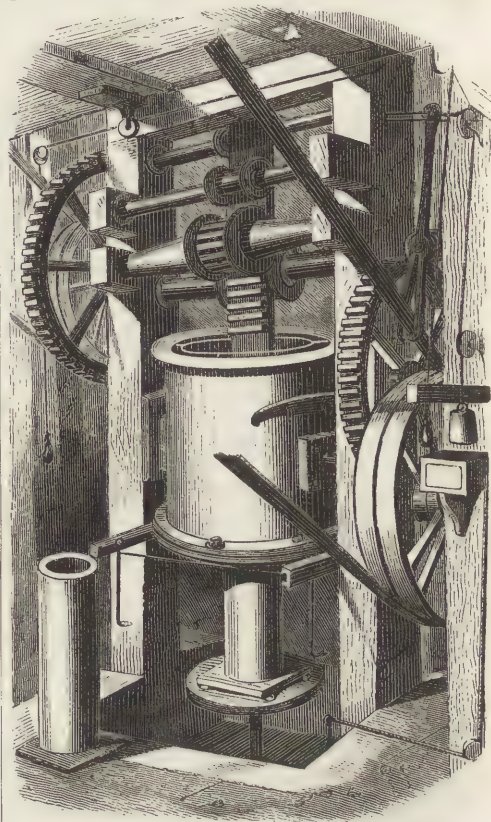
DRAIN-PIPE MAKING MACHINE.
